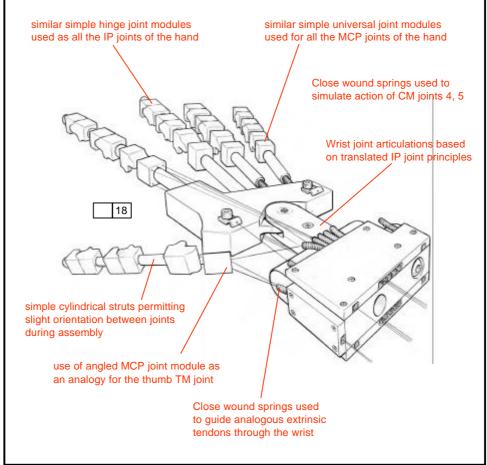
Drawing Showing Joints Assembled into a Skeletal Hand Form
